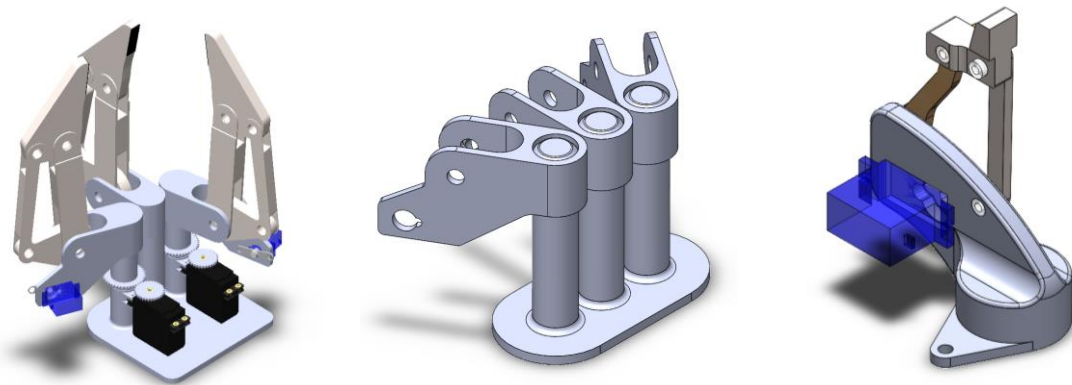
Various prototypes to achieve rotating motion: (a) Gears for rotation, (b) Use of bearings for smooth rotation, (c) Use of extended lever type linkage (from left to right)
